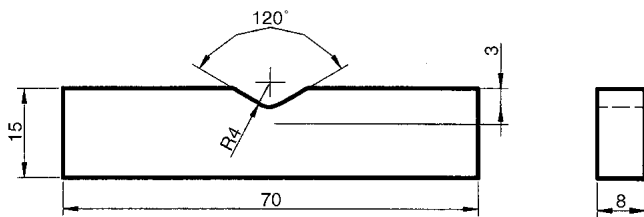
Geometry of fatigue test specimen (stress concentration factor, $K_t = 1.6$; all dimensions are in millimeters)
